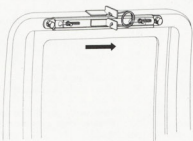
Removing Service Lid Lower Panel X6224 No.1
